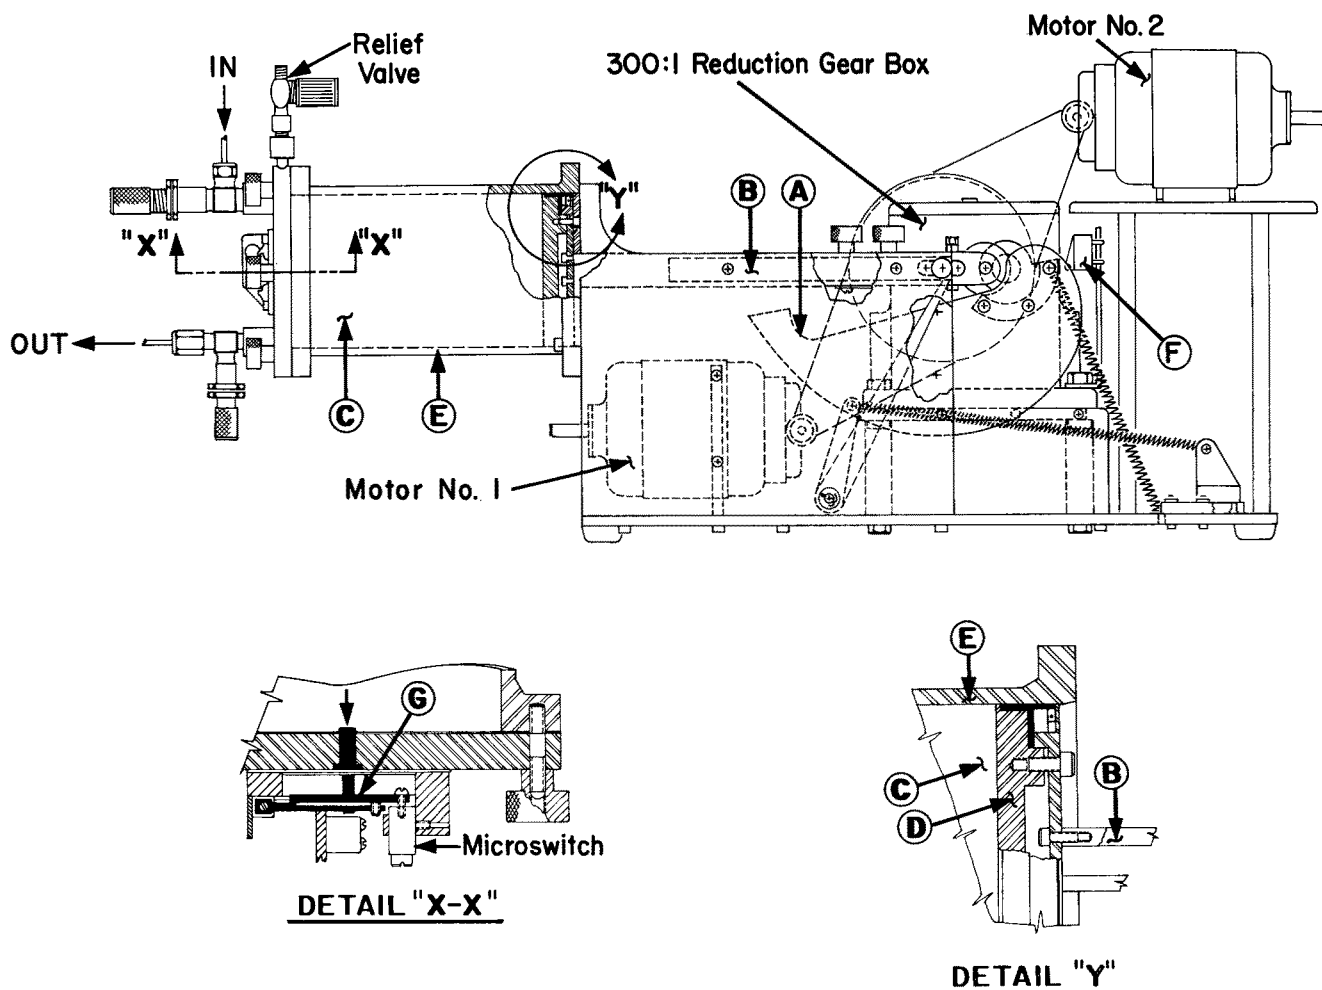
Simplified design drawing of the gradient pump. *A* is the cam that drives the piston rod *B*. Motor No. 1 is used during the run to drive the cam, and motor No. 2 is a fast reverse motor for charging the pump chamber, *C*, before the run; an interlocking switch on the control panel (see Fig. 3) prevents simultaneous operation of both motors. The piston, *D*, has a Teflon gasket that forms the seal between the piston and the cylinder wall, *E*. The cylinder is honed to within 0.0005 in. of true round. Limit switches at *F* and a combined pressure and limit switch at *G* prevent the cam from overriding the follower. Detail "X-X" is an enlarged cross-sectional view of the combined forward-limit and pressure switch on the chamber face plate. Detail "Y" is an enlarged sectional view of the piston and cylinder showing the Teflon seal assembly between the piston and the cylinder wall. Teflon is shown in solid black and stainless steel in diagonal shading in all views. All parts of the pump in contact with the solvent are either stainless steel or Teflon.
